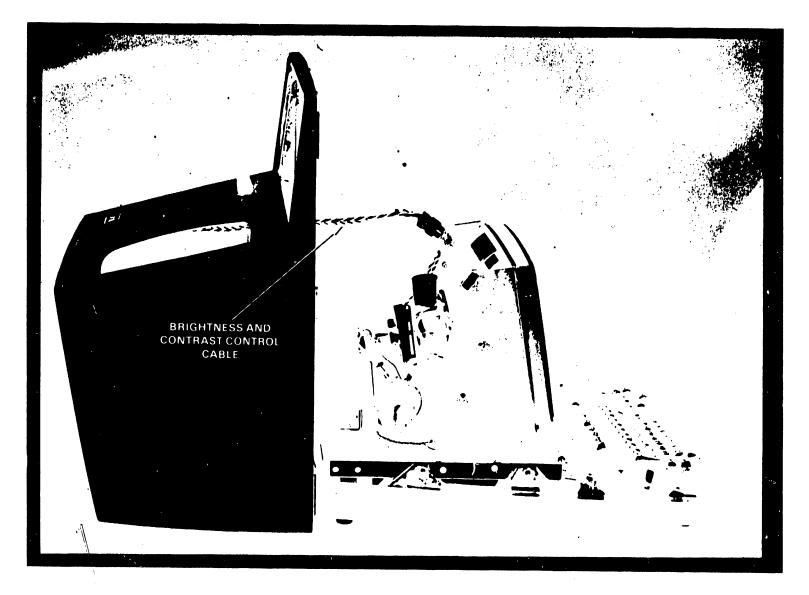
WORK STATION (5506-1) — COVER REMOVED, SIDE VIEW, SHOWING CONTROL CABLE
